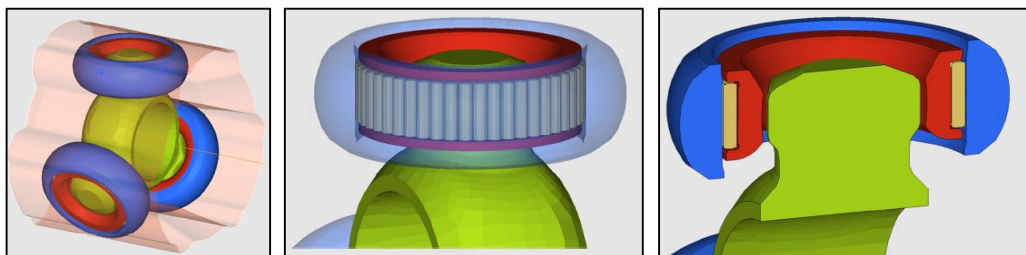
Driveshaft Inboard joint – Needle Roller Bearing Arrangement
